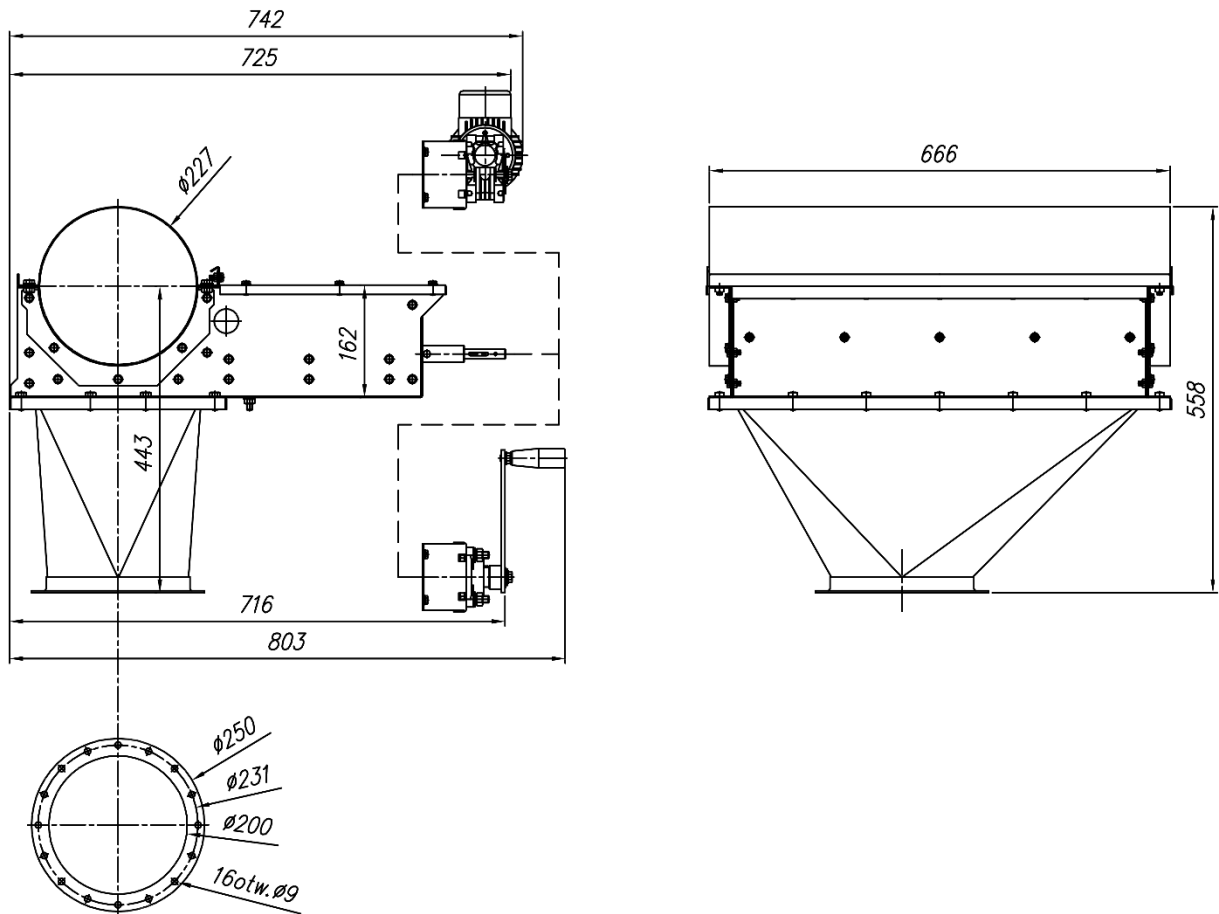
Basic installation dimensions of PSX220-ZAS/... shutters. (dimensions as mm).
